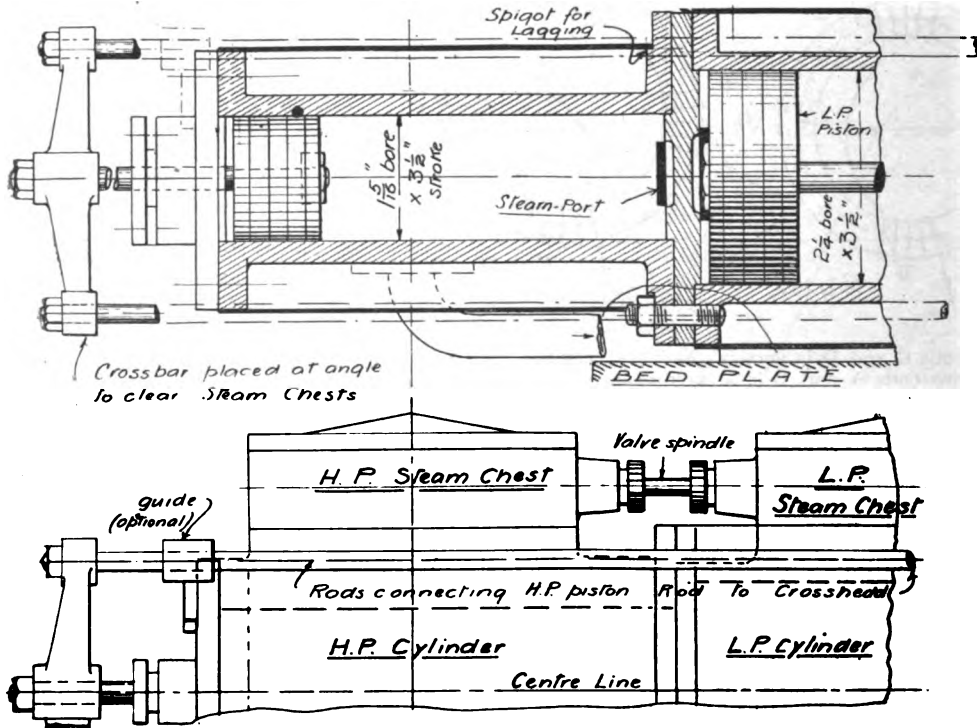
SECTIONAL ELEVATION AND PLAN OF SUGGESTED ARRANGEMENT FOR ADDING A H.-P. CYLINDER TO AN EXISTING 2½ BY 3½ ENGINE. (Scale: Half full size.)
